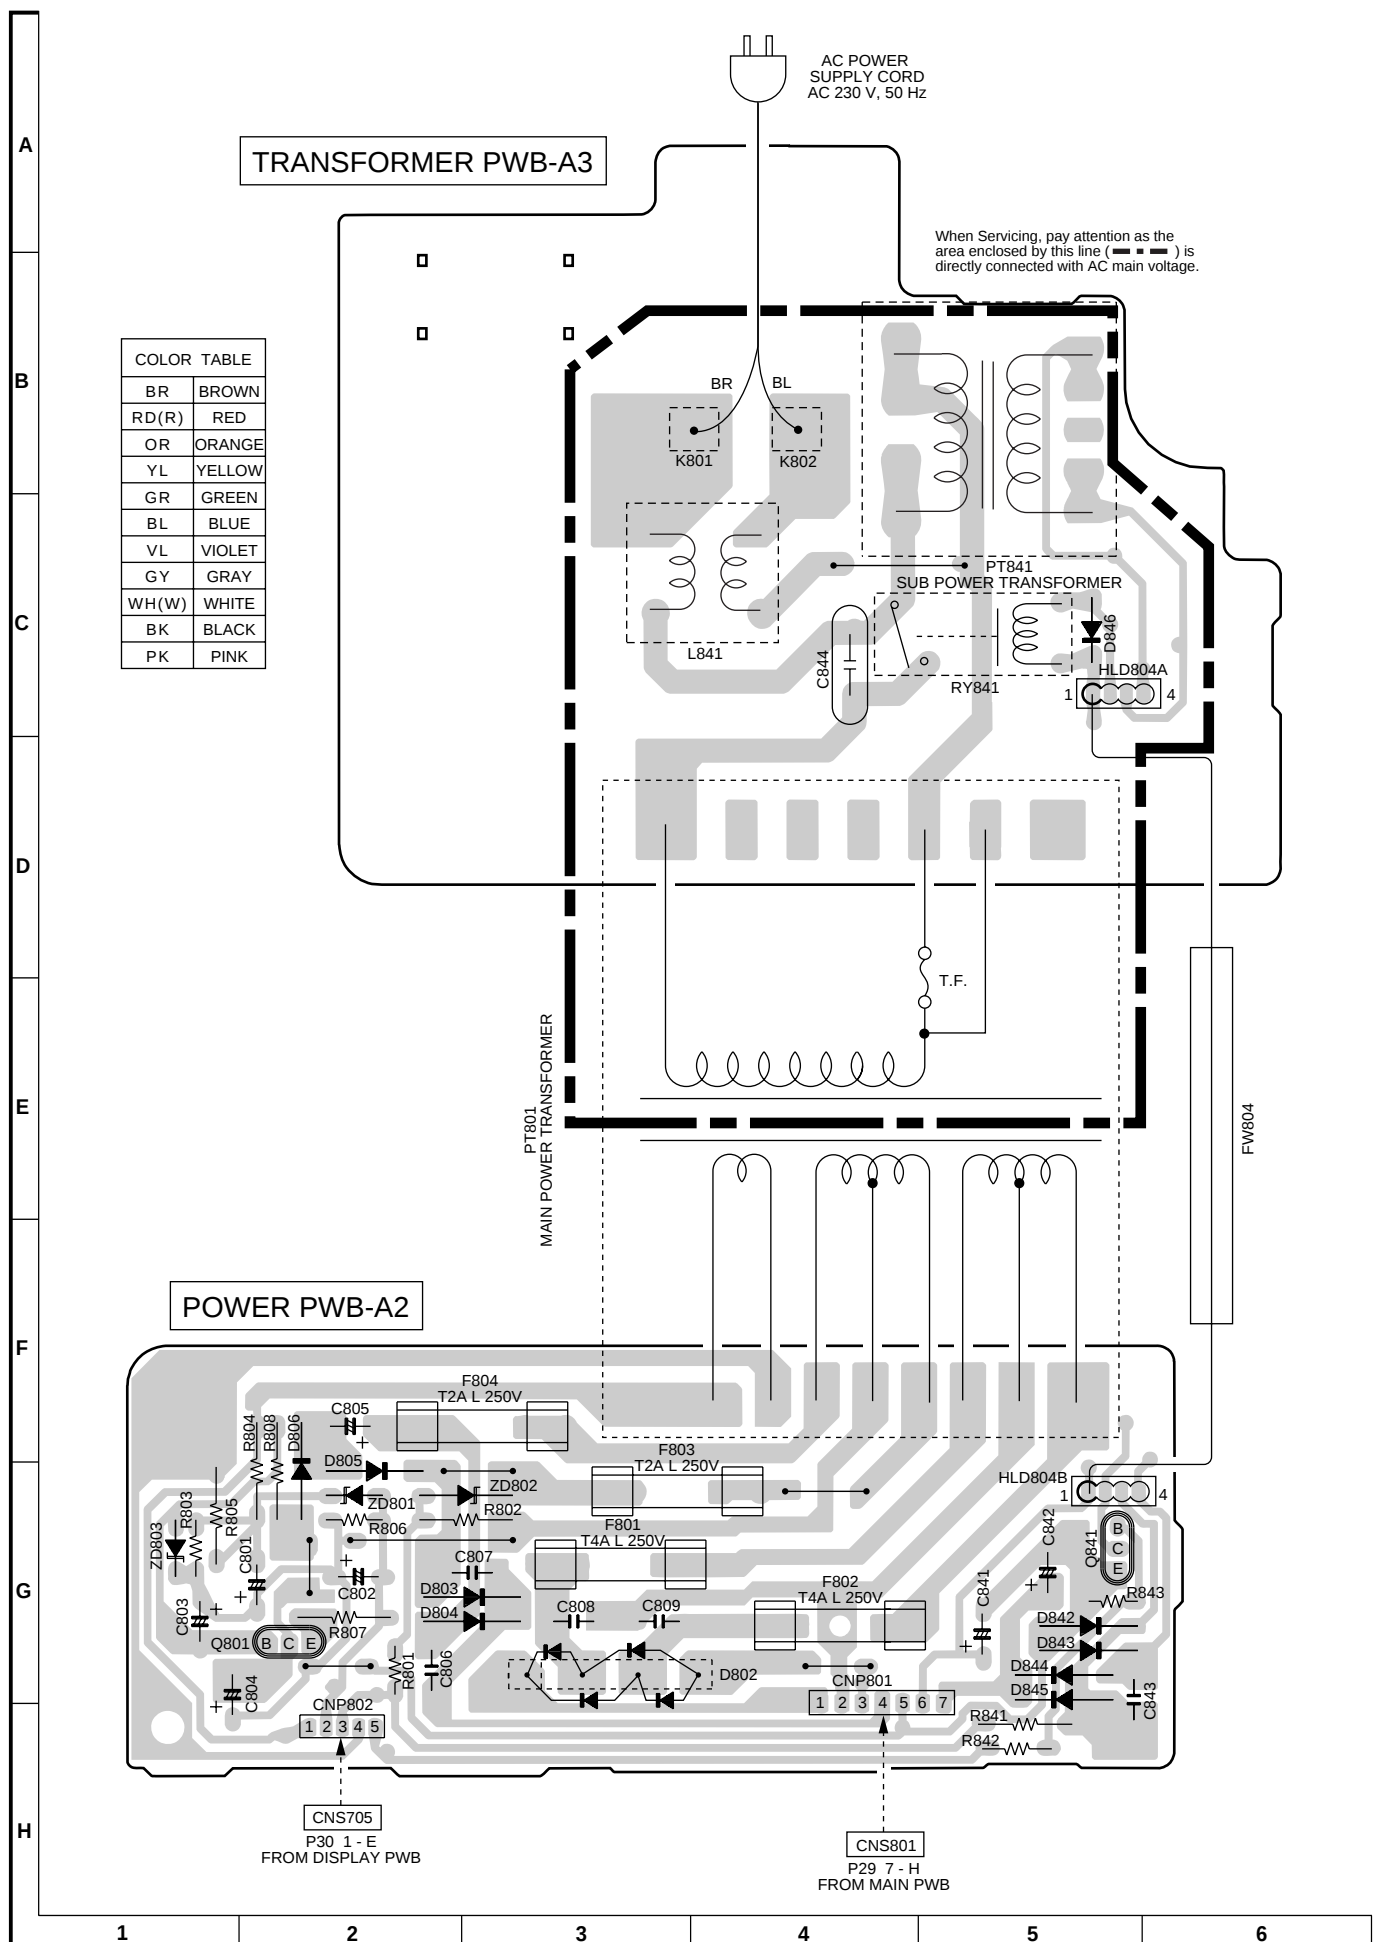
WIRING SIDE OF P.W.BOARD (7/7)
